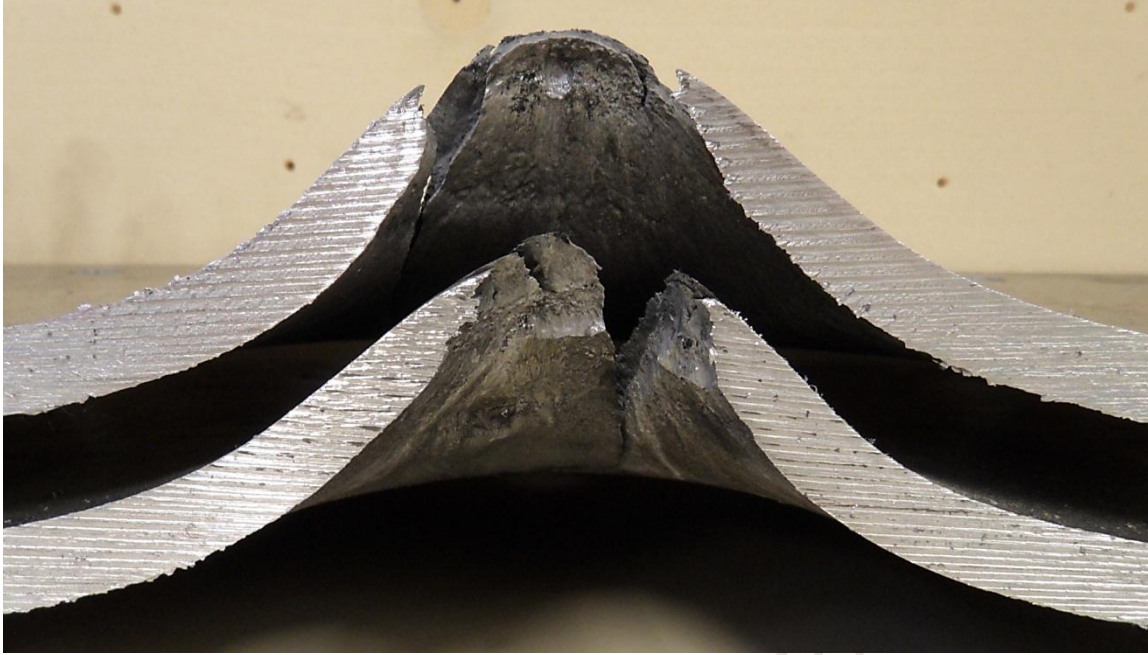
Cross-Section photograph of AL-5 showing fracture surfaces and displacement profiles
